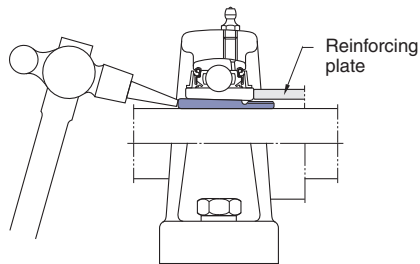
Fitting adapter sleeve to bearing with tapered bore
